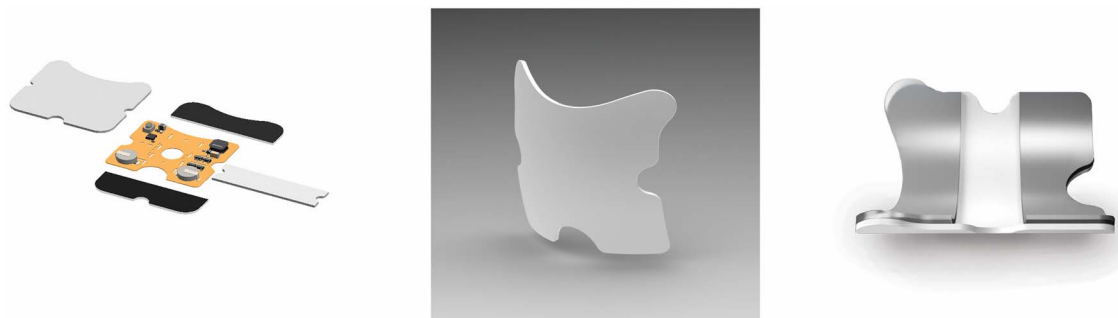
Device description. Left: Exploded view depicting the main components; Center: Front view; Right: Skin-side view.
